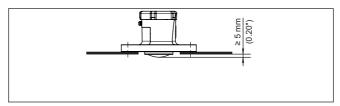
Recommended socket mounting of VEGAPULS Air 42
